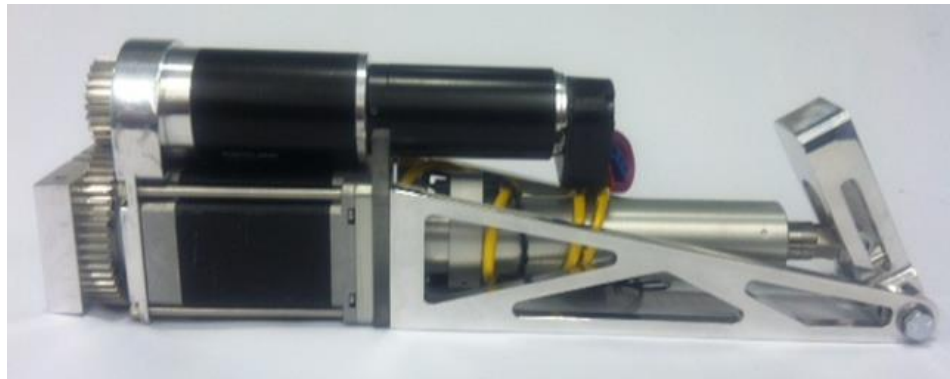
Shown is the final upper arm assembly. All manufactured pieces are made of aluminum for a lightweight design, and all the components were designed to be as compact as possible. The upper arm measures 12 inches in length and 2.5 inches in width.
